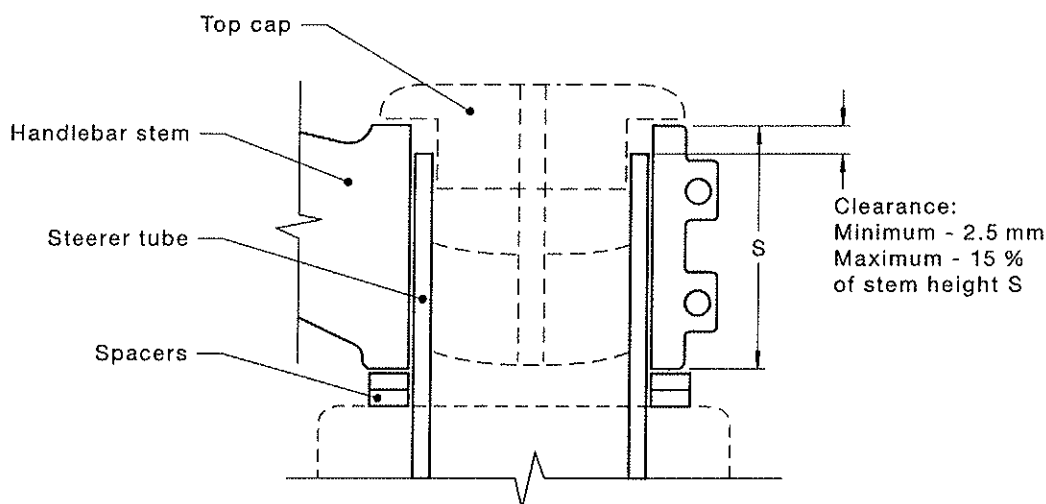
EXTERNALLY ATTACHED STEERER TUBE INSERTION LIMITS
